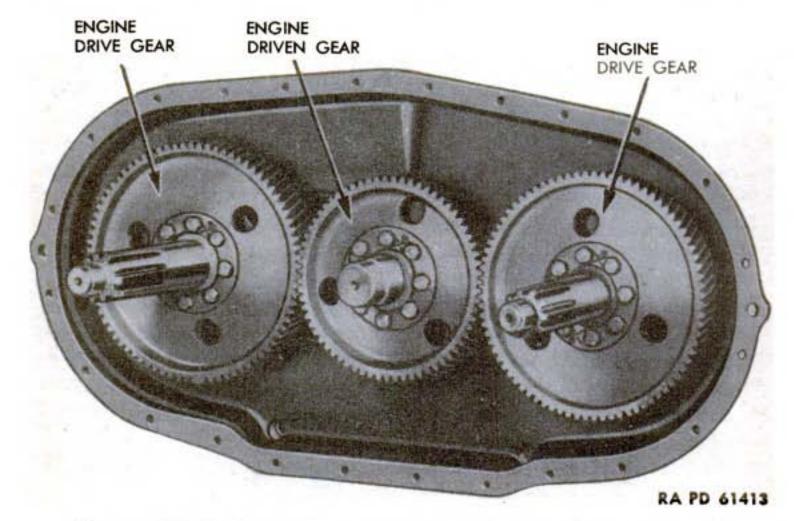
Drive and Driven Gears in Transfer Gear Unit
